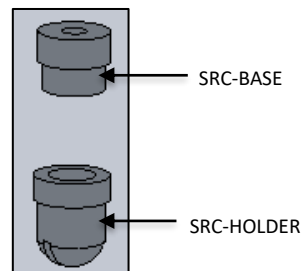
SLIP RING COUPLER (1) CONTENTS
